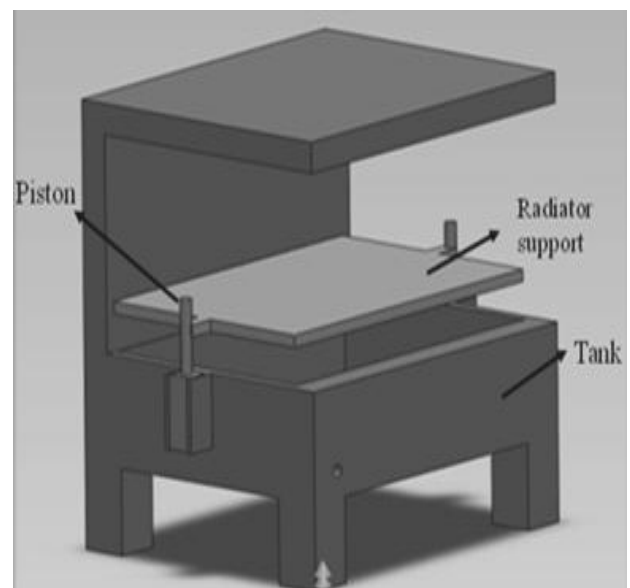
Concept of Radiator & Evaporator leak testing machine.
